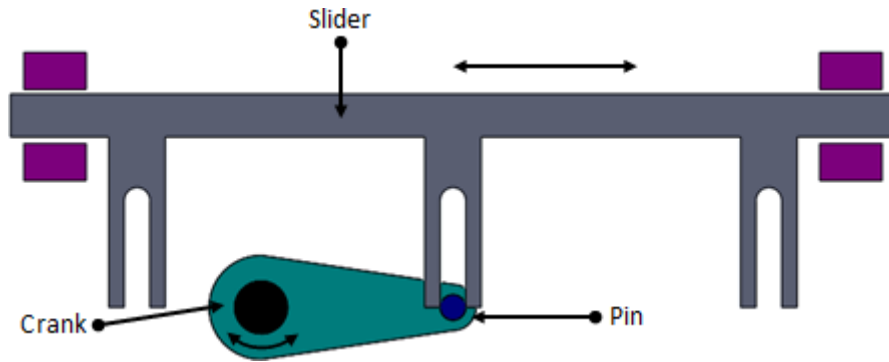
Linear intermittent motion using Geneva mechanism
